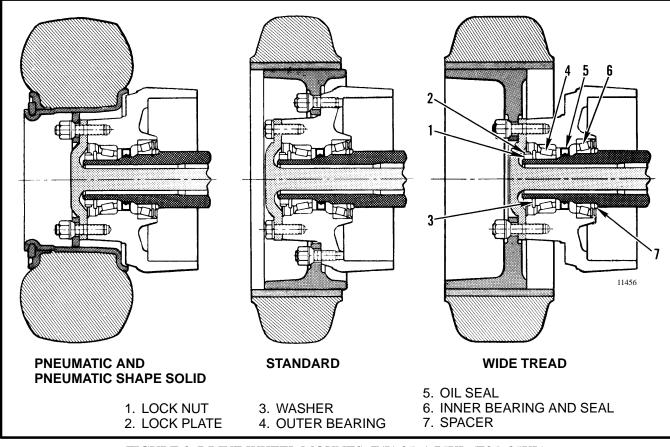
DRIVE WHEEL MOUNTS, E/J1.25-1.75XL (E25-35XL)
